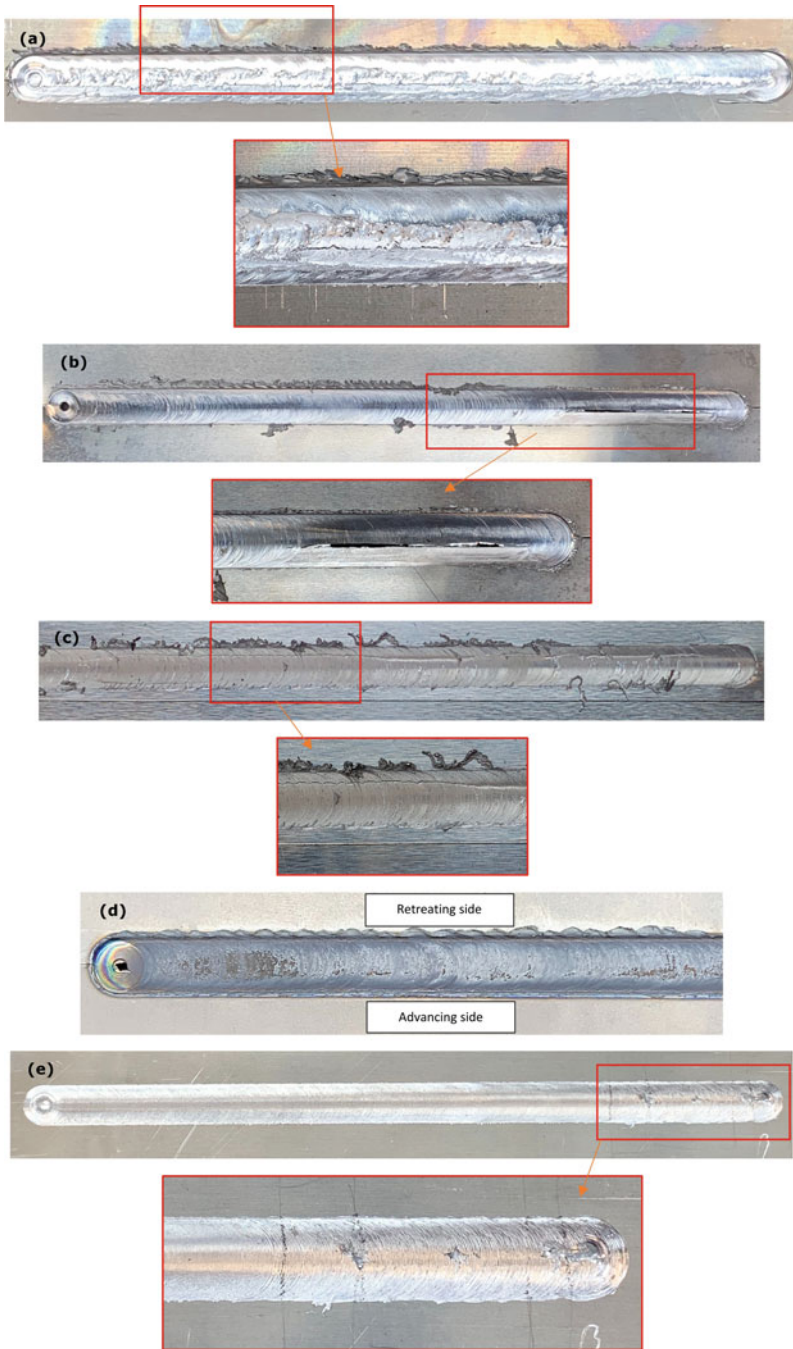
Friction stir weld (FSW) joints with defects; (a) butt joints of AA2024-T3 of 2 mm in thickness defect types: exceeds flash, cracking of the joints, the unnormal stirring of the material, (b) butt joints of AA7075-T6 of 0.5 mm in thickness, defect types: exceeds flash, wormhole, (c) lap joints of AA2024-T3 1 mm in thickness, defect types: exceeds flash, cracking of the joints, (d) butt joints of titanium grade 5 of 0.5 mm in thickness, defect types: excessive oxidation of the joints and (e) butt joints of AA2024-T3 of 0.5 mm in thickness, defect type: cavities
